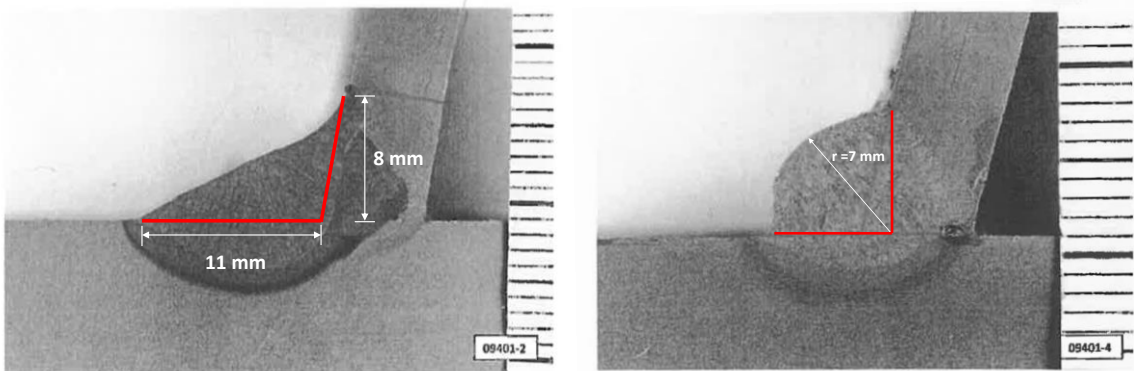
Weld profiles: automatic weld (left), hand weld (right)
